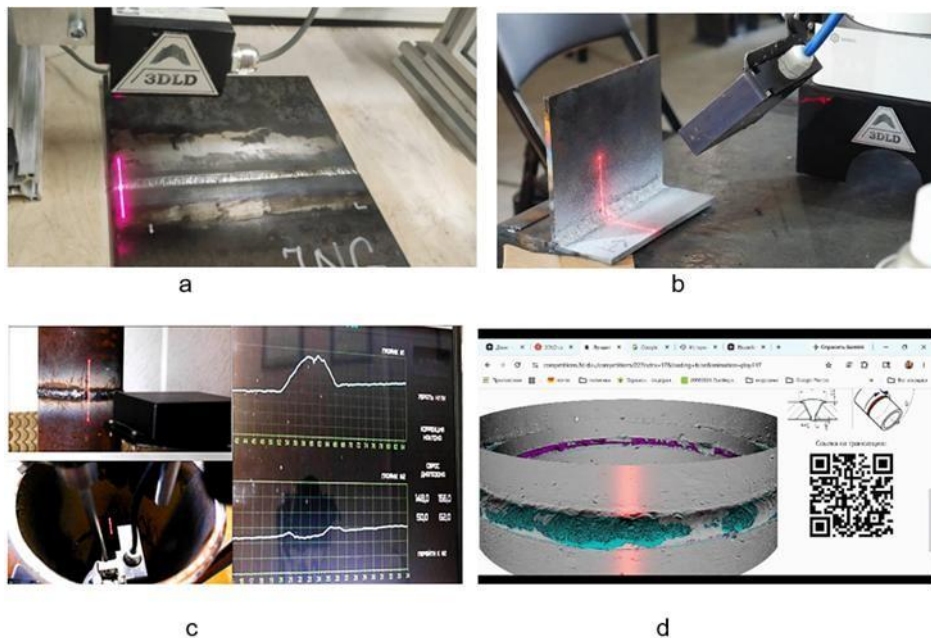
Laser scanning of a butt weld (a), a fillet weld (b), a coupon plate, and a coupon pipe with deviation visualization from the reference (d). ● above reference; ● below
